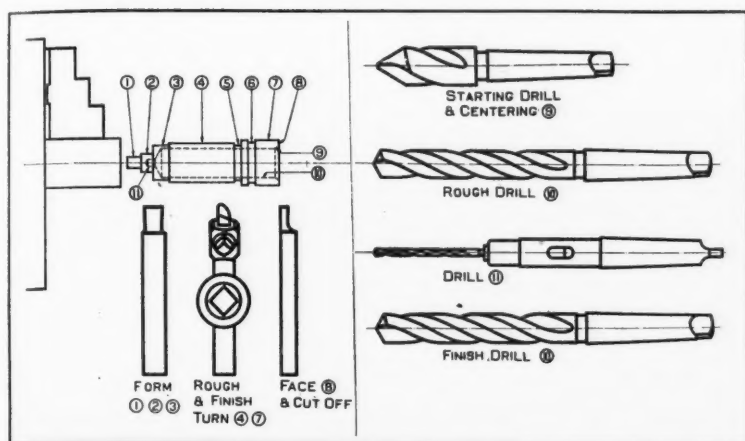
Tooling Lay-out for Suction and Discharge Valve, Machined in an Engine Lathe in Lots of Ten
